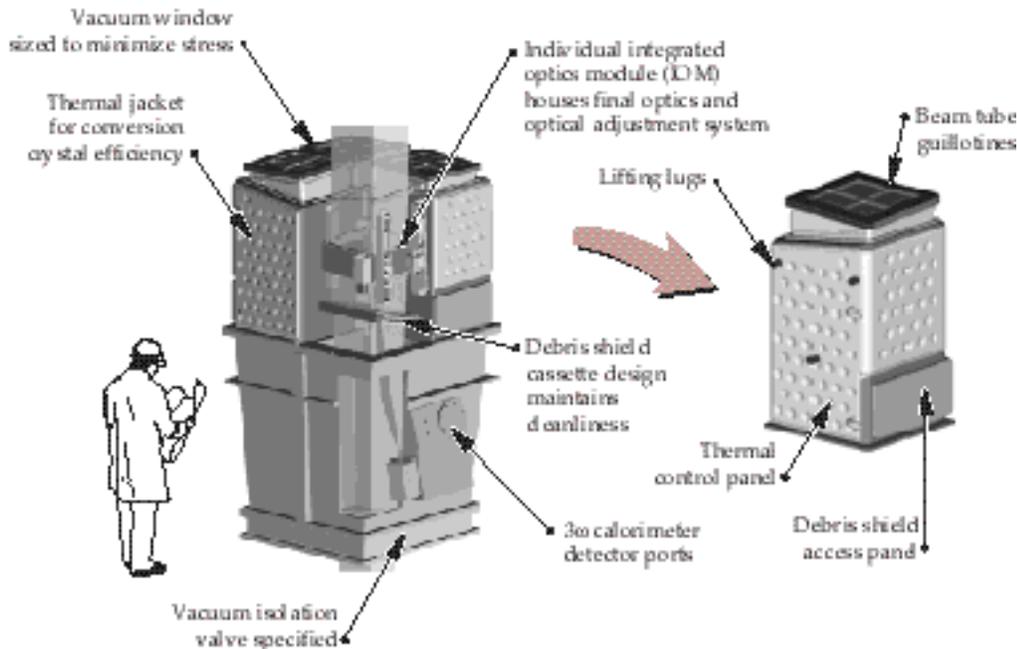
The final optics assembly is an integrated optomechanical design package. (40-00-1097-2269pb01)
